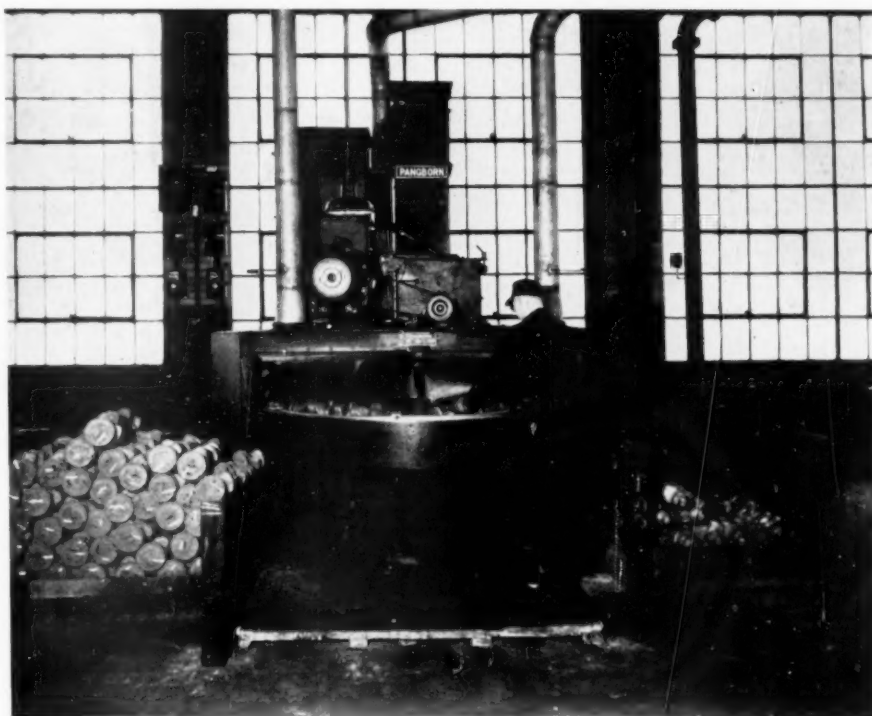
Table-type blast cleaning machine in a forge and stamping plant in Canada.
